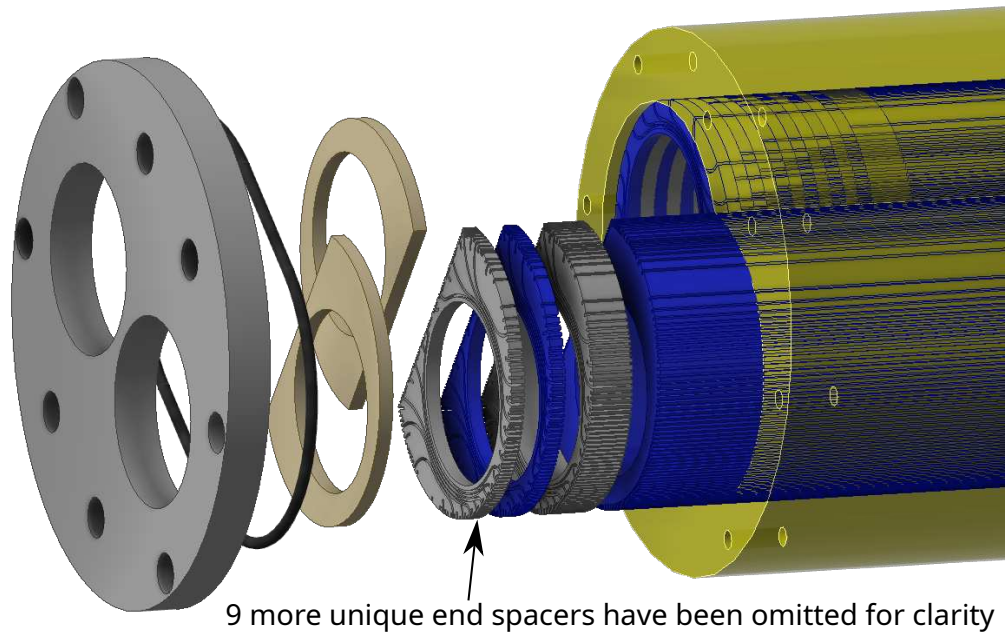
Exploded view of the opposite-field septum magnet CAD model.
